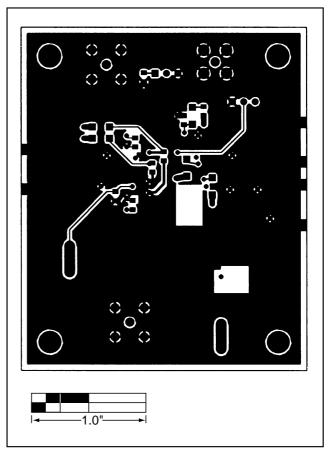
MAX2102 EV Kit PC Board Layout—Solder Side
